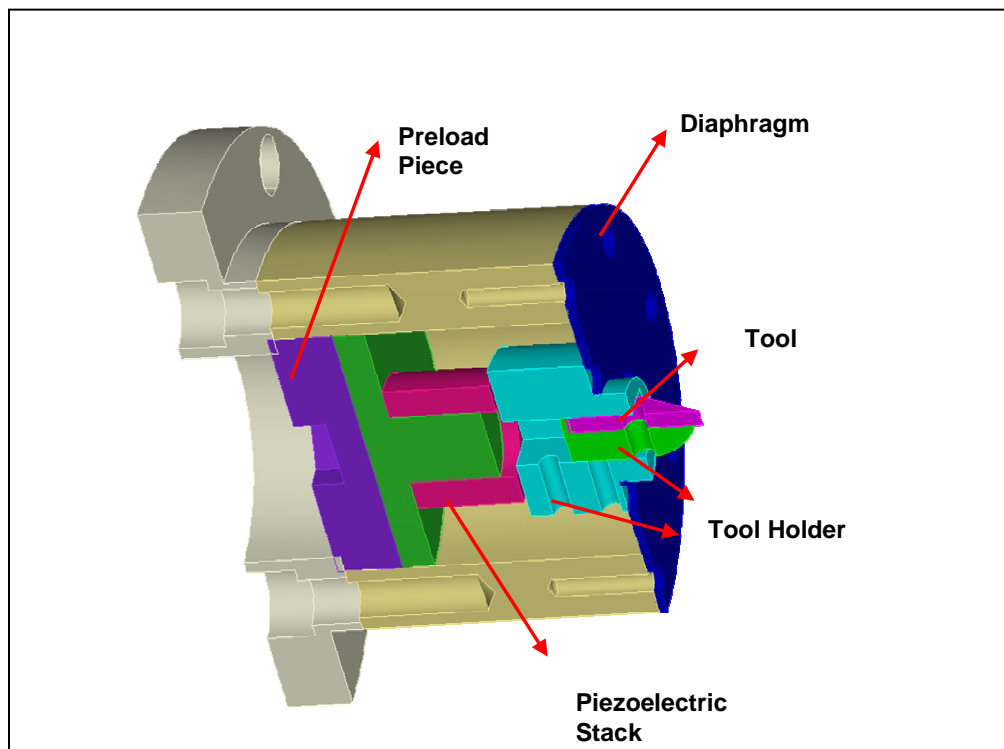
Labeled Cross-Section of Lathe Tool Assembly
